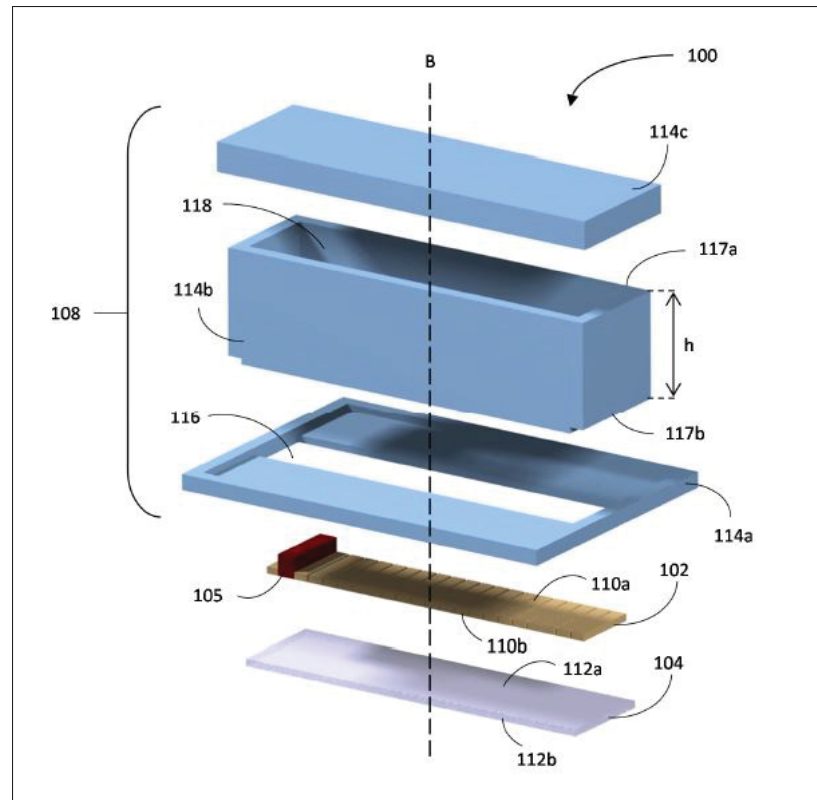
Exploded view of the transducer of Fig. 5.1
